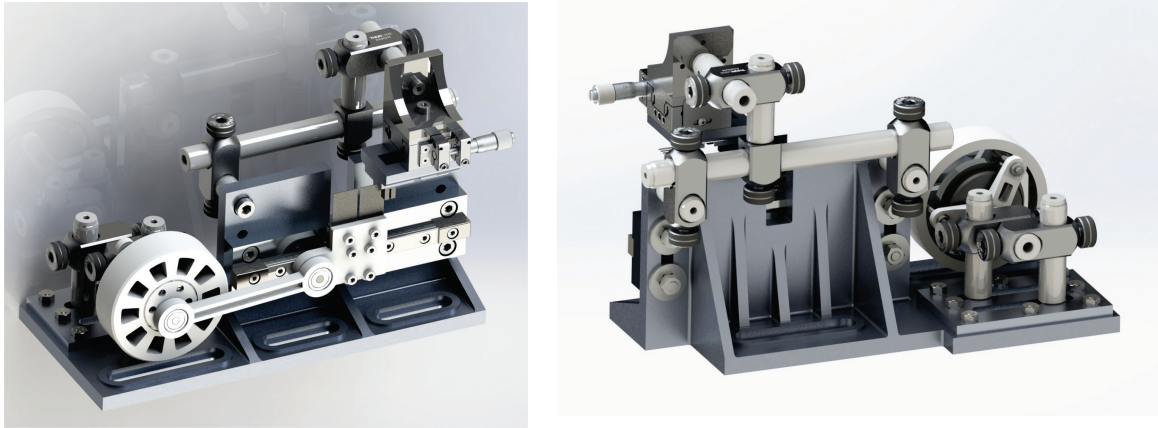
Front and back view of the rendered slit-optical switch assembly, with slider-crank linkage driven by hard disc motor.
